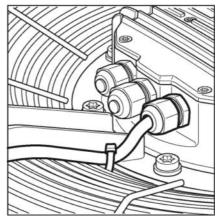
Fan installed lying flat, cable routed as a water trap.
